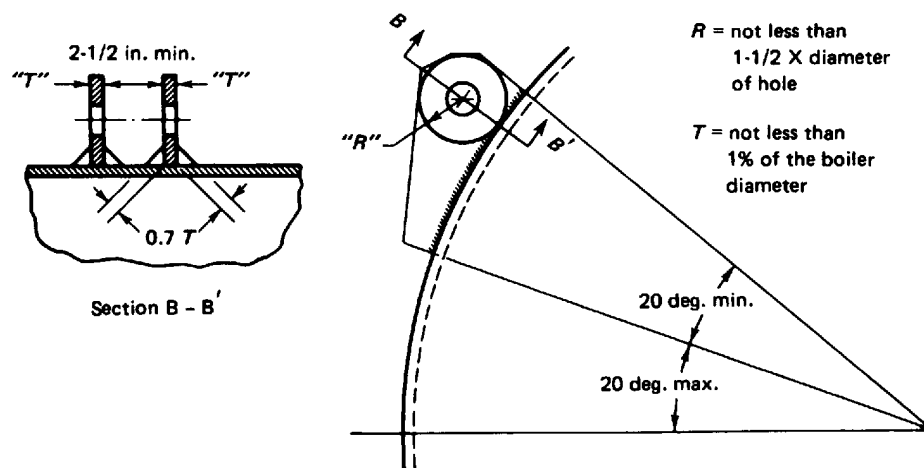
(b) WELDED BRACKET CONNECTION FOR HORIZONTAL-RETURN TUBULAR BOILER
